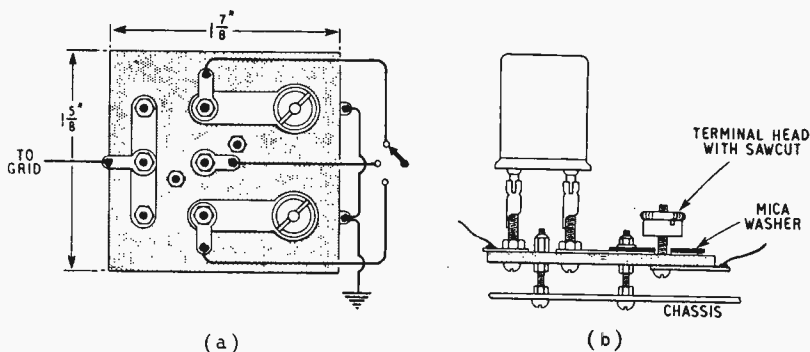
Plan (a) and side view (b) of crystal holder and trimmer panel assembled from odd parts.
